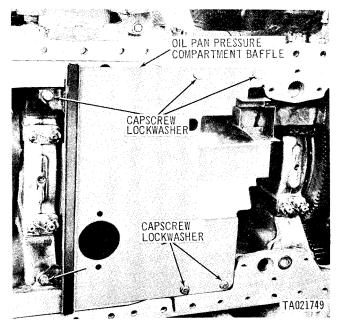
Removing or installing oil pan pressure compartment bqffle.
